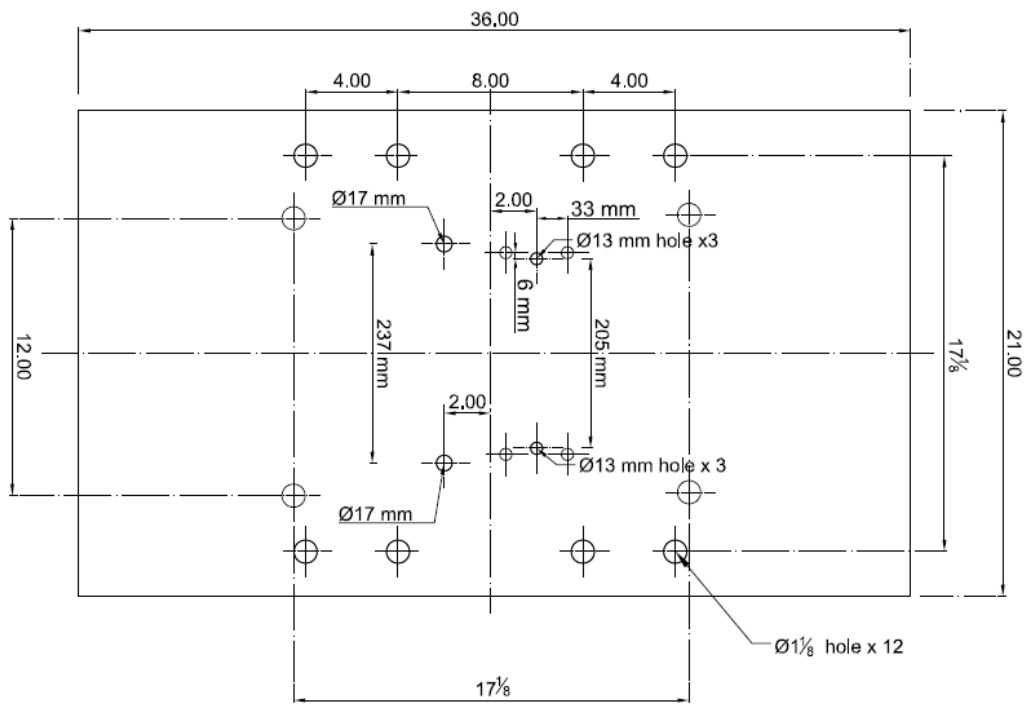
Steel plate support II, thickness 1.00 in., unit (in.)
